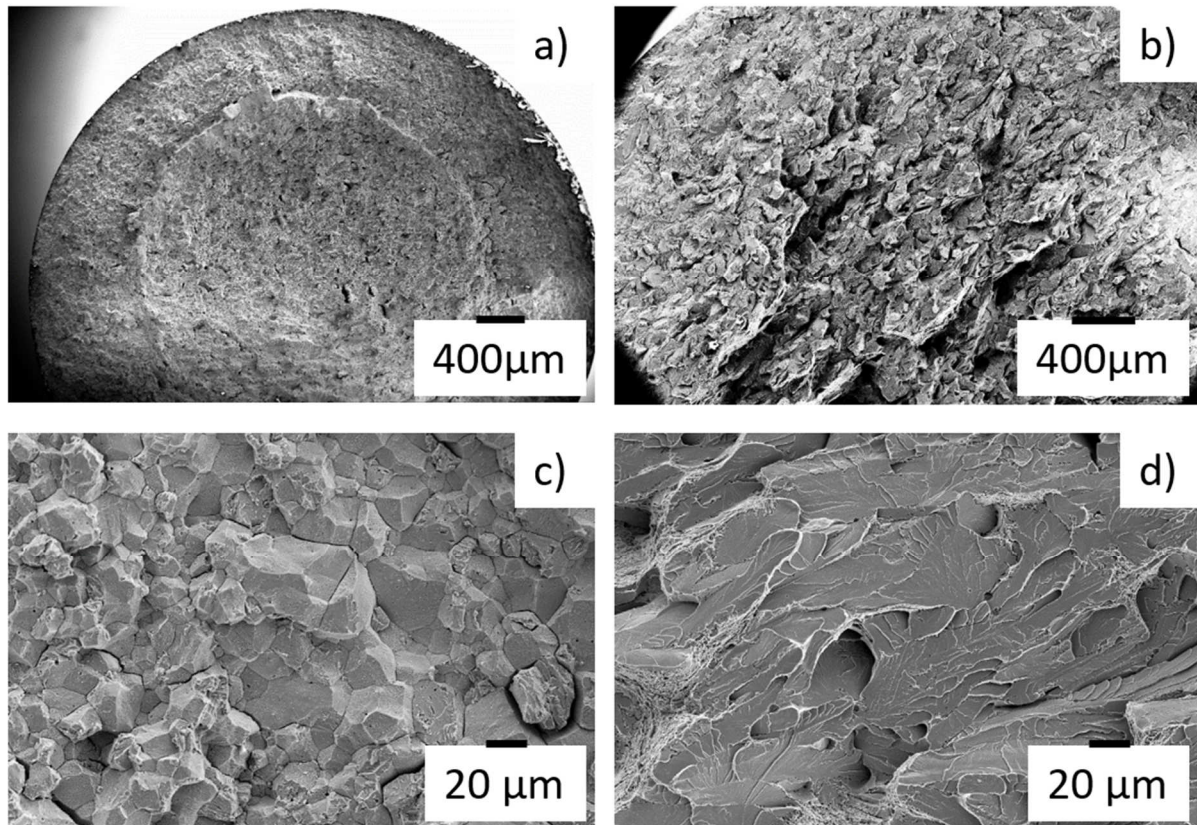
Fracture surfaces after tensile test at 10^{-4} mm/s under hydrogen charging of smooth specimens of (a), (c) wrought steel showing intergranular fracture close to the specimen surface and (b), (d) SLM-ed steel showing transgranular cleavage on the entire surface.
